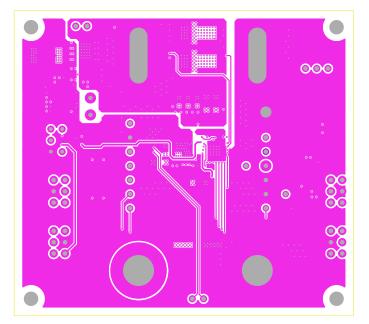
PCB - Inner Layer - Layer 5 (Top View)
